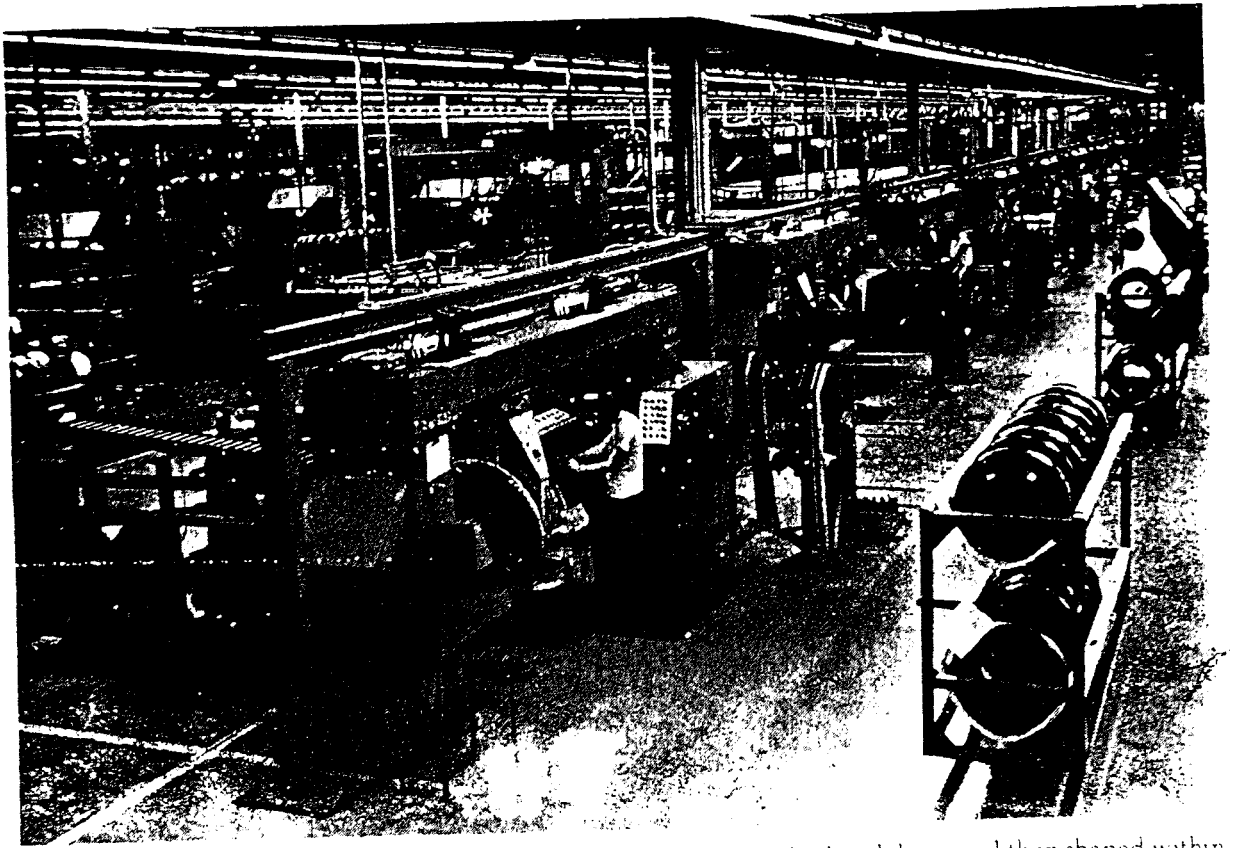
Radial-tire building machine. The carcass is built on a cylindrical drum and then shaped within the tread and bell. (*General Tire and Rubber Co.*)
